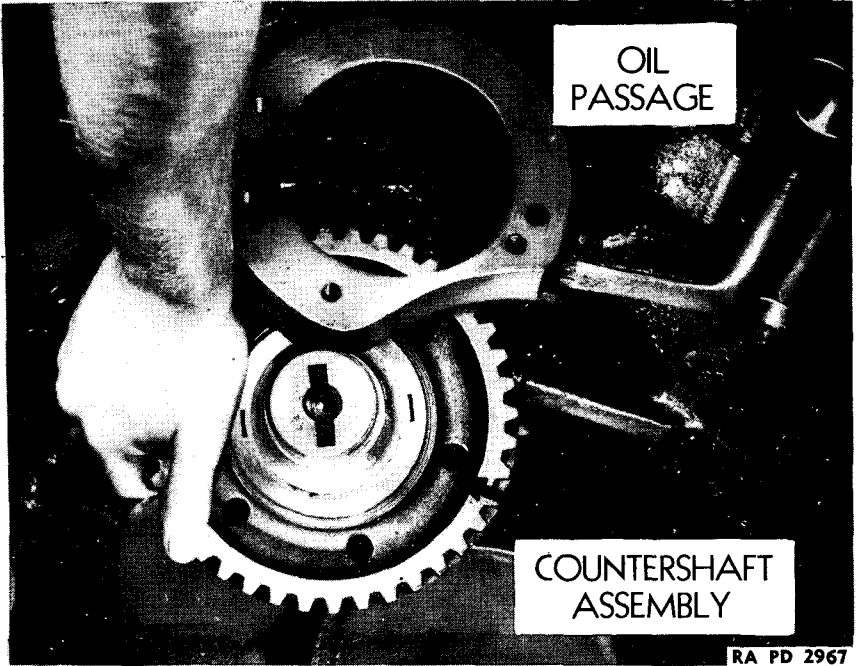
REMOVING COUNTERSHAFT ASSEMBLY
